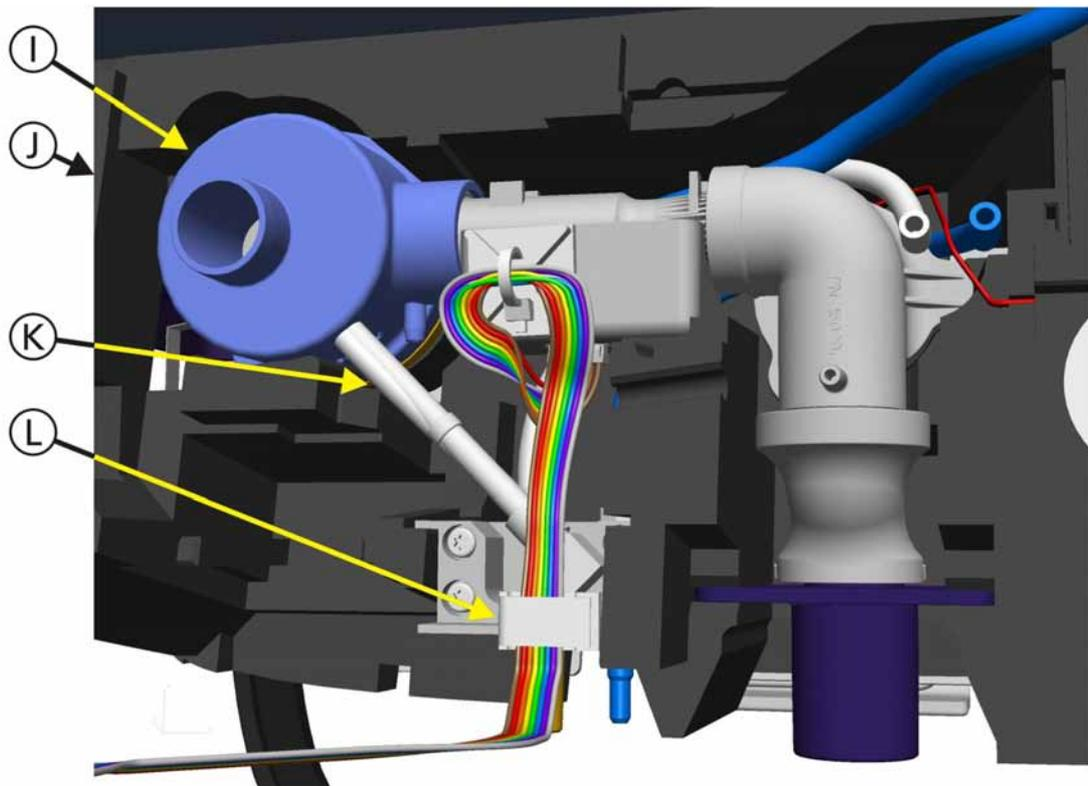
Inspiratory Valve, Qvent Flow Sensor and Ambient Valve Assembly, Step 2
